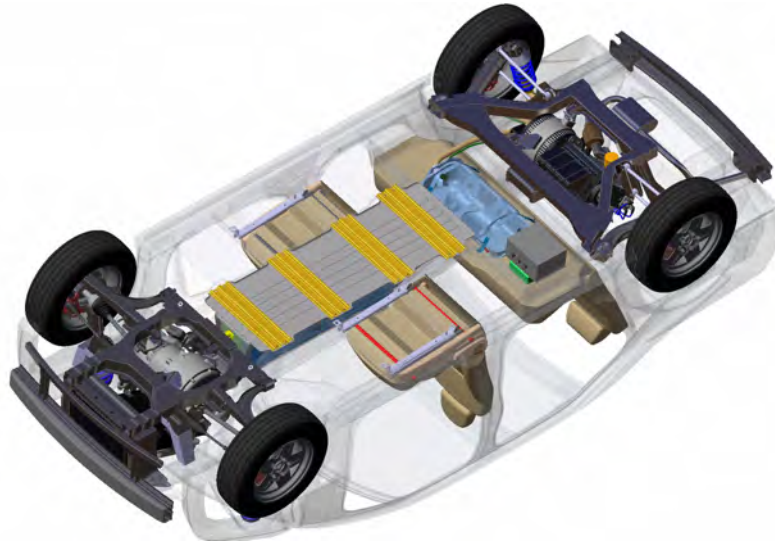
FSV-2 PHEV₄₀ fuel tank packaging
